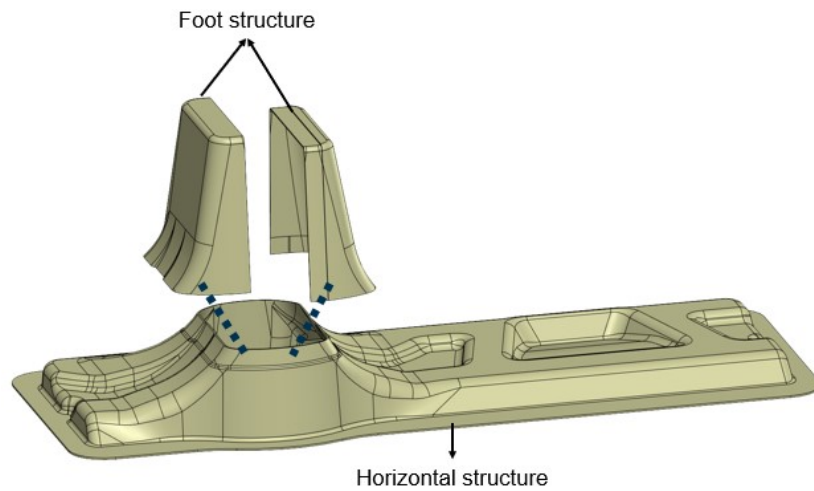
The CAD design of the three-piece strategy used for making preforms.
